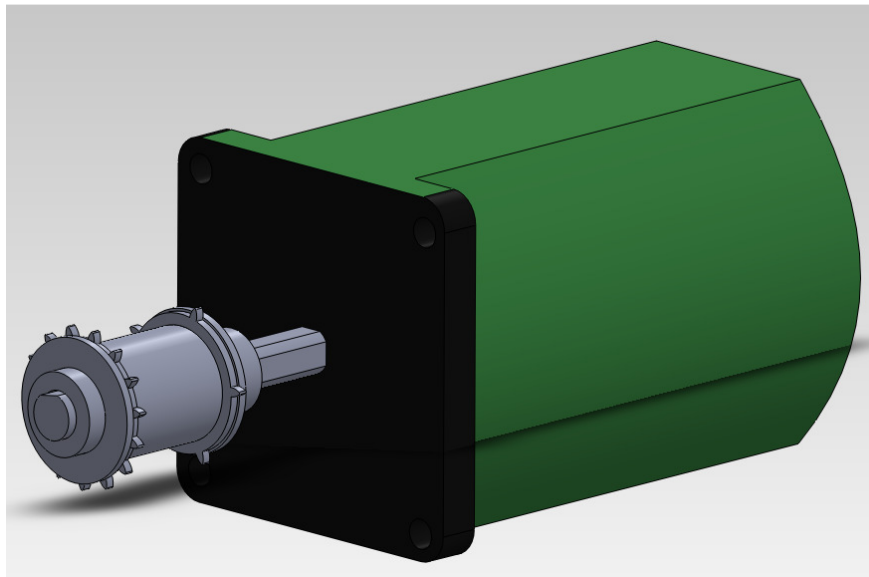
Stepper Motor Coupled to a Sprocket Pair
